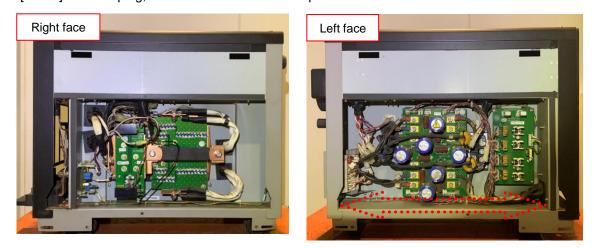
Wiping the Bottom of the Right and Left Faces of Welder
